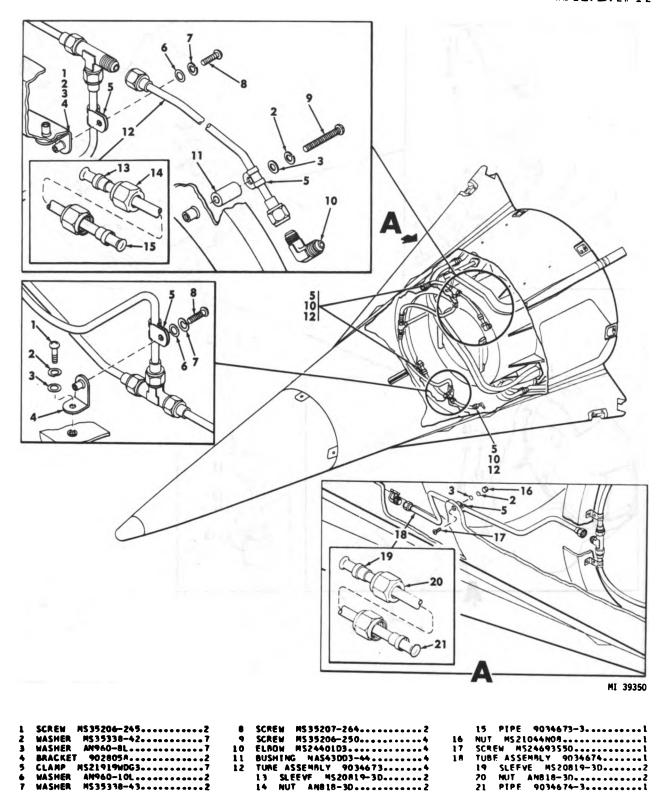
EQUIPMENT INSTALLATION. FORWARD BODY ASSEMBLY /9020575 AND 9979613/
